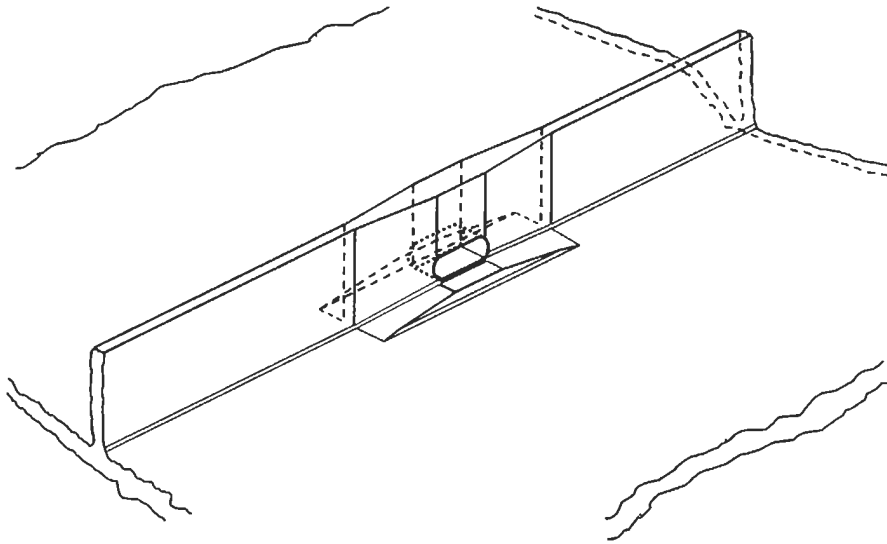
Typical design of integral local reinforcement to prevent cracks in stiffened structures.
